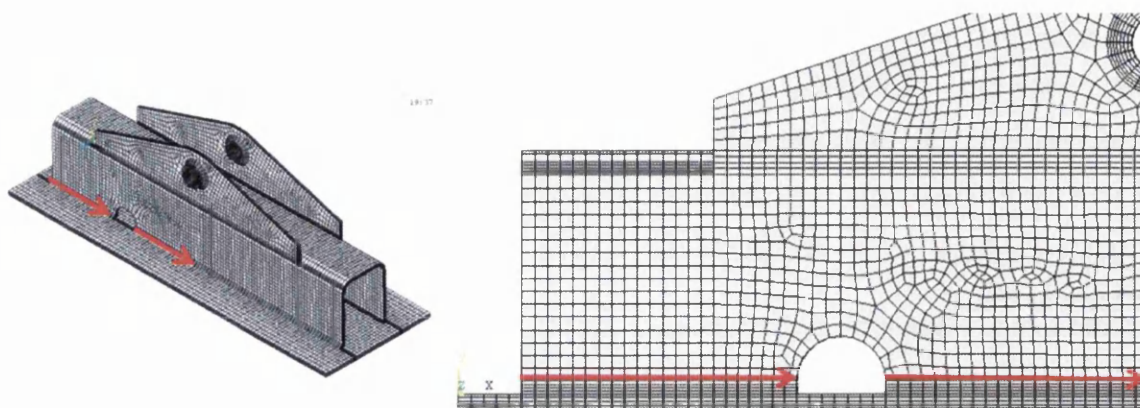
Base plate weld toe at mouse hole region for structural stress calculation - top-hat section to base plate fillet weld
